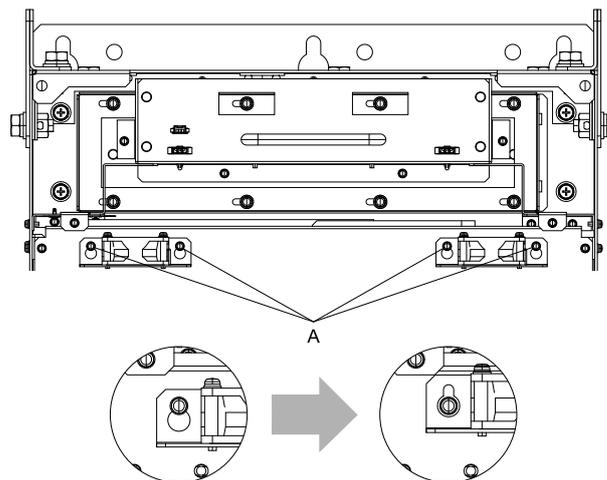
Slide the Circuit Board Cooling Fan Unit
